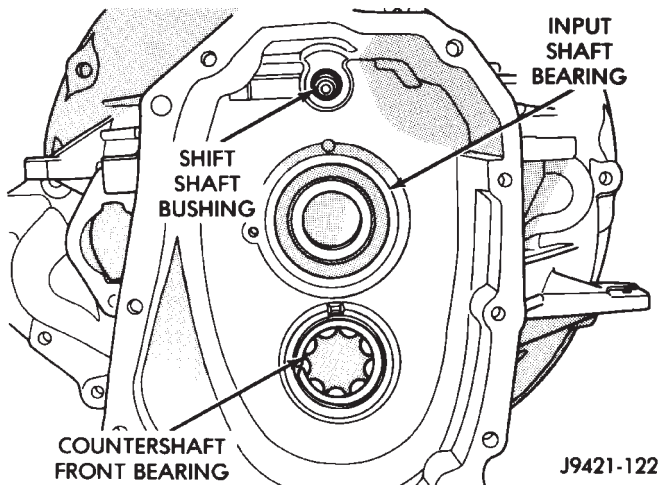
Input Shaft Bearing And Countershaft Front Bearing Installation
